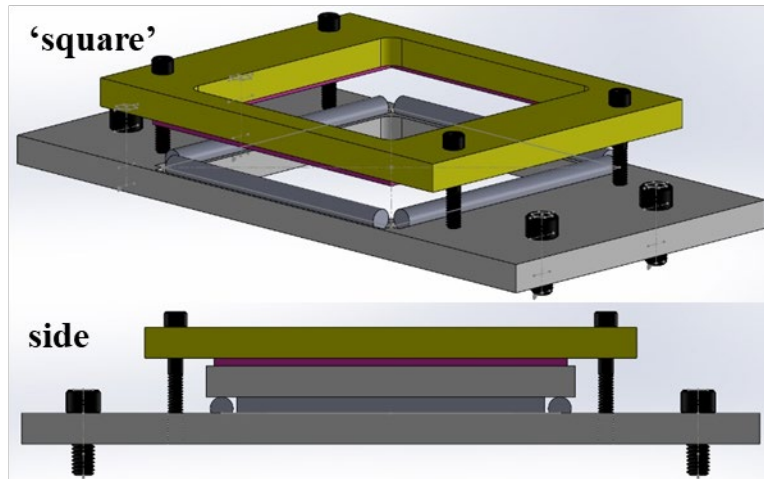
Impact test fixture for drop tower impact testing illustrating “square” simply supported boundary conditions without impact sample (top) and side view with impact sample (bottom)
